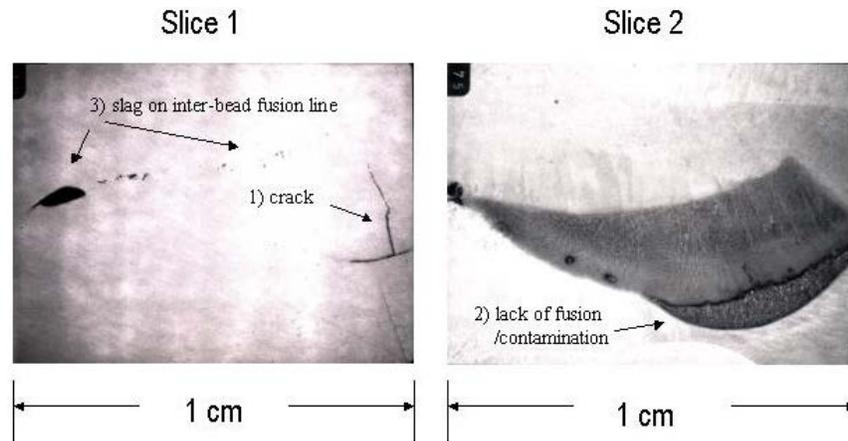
Cross Section of Thickness Transition Single V Weld for PWR Vessel
